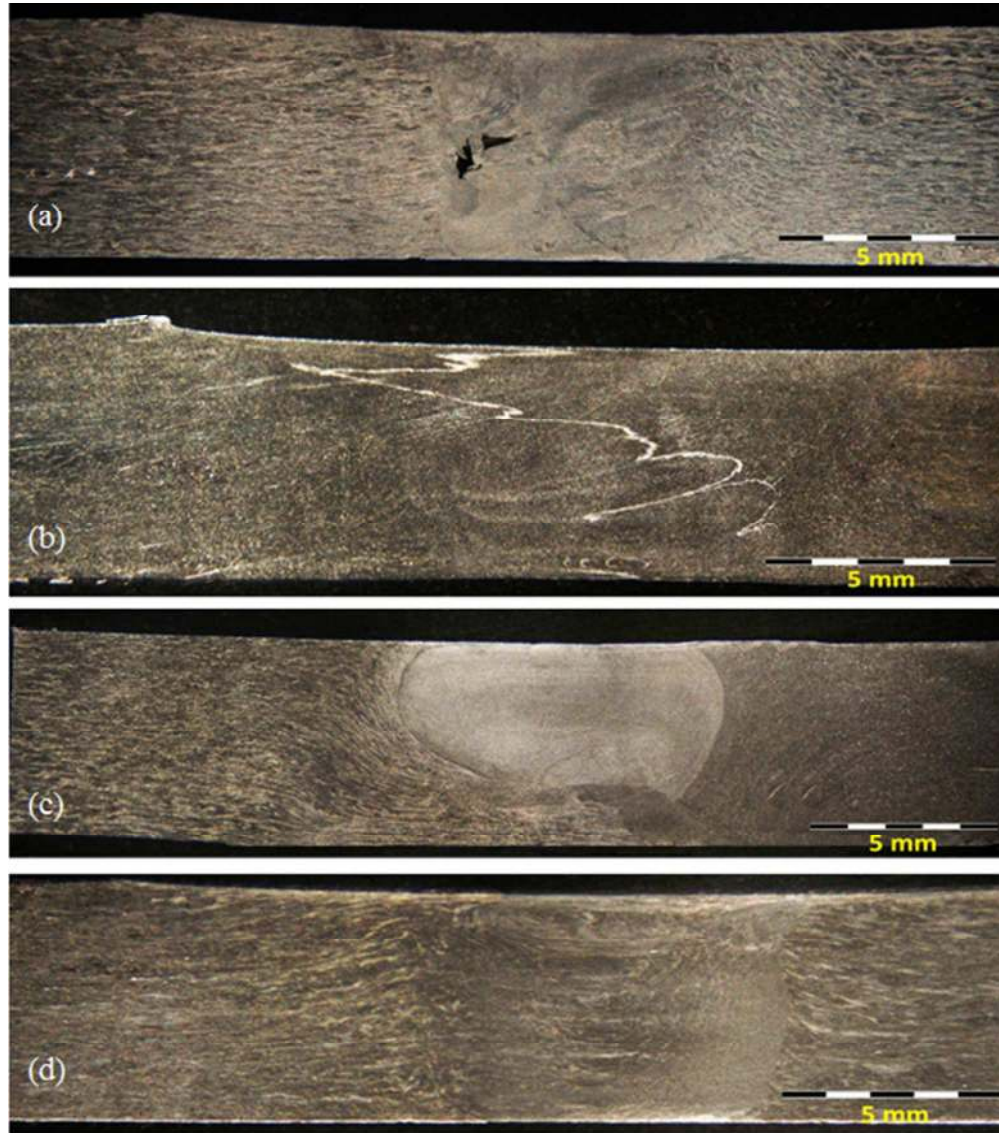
Macrostructure of some processed samples at various welding conditions, a) formation of cavity in the specimen FSWed at 600 rpm and 25 mm/min, b) non-homogeneous distribution of SiC particles in the specimen FSWed at 600 rpm and 75 mm/min, c) incomplete stirring of material in the stir zone of specimen FSWed at 1000 rpm and 25 mm/min, d) fair macrostructure in the specimen FSWed at 800 rpm and 125 mm/min.
